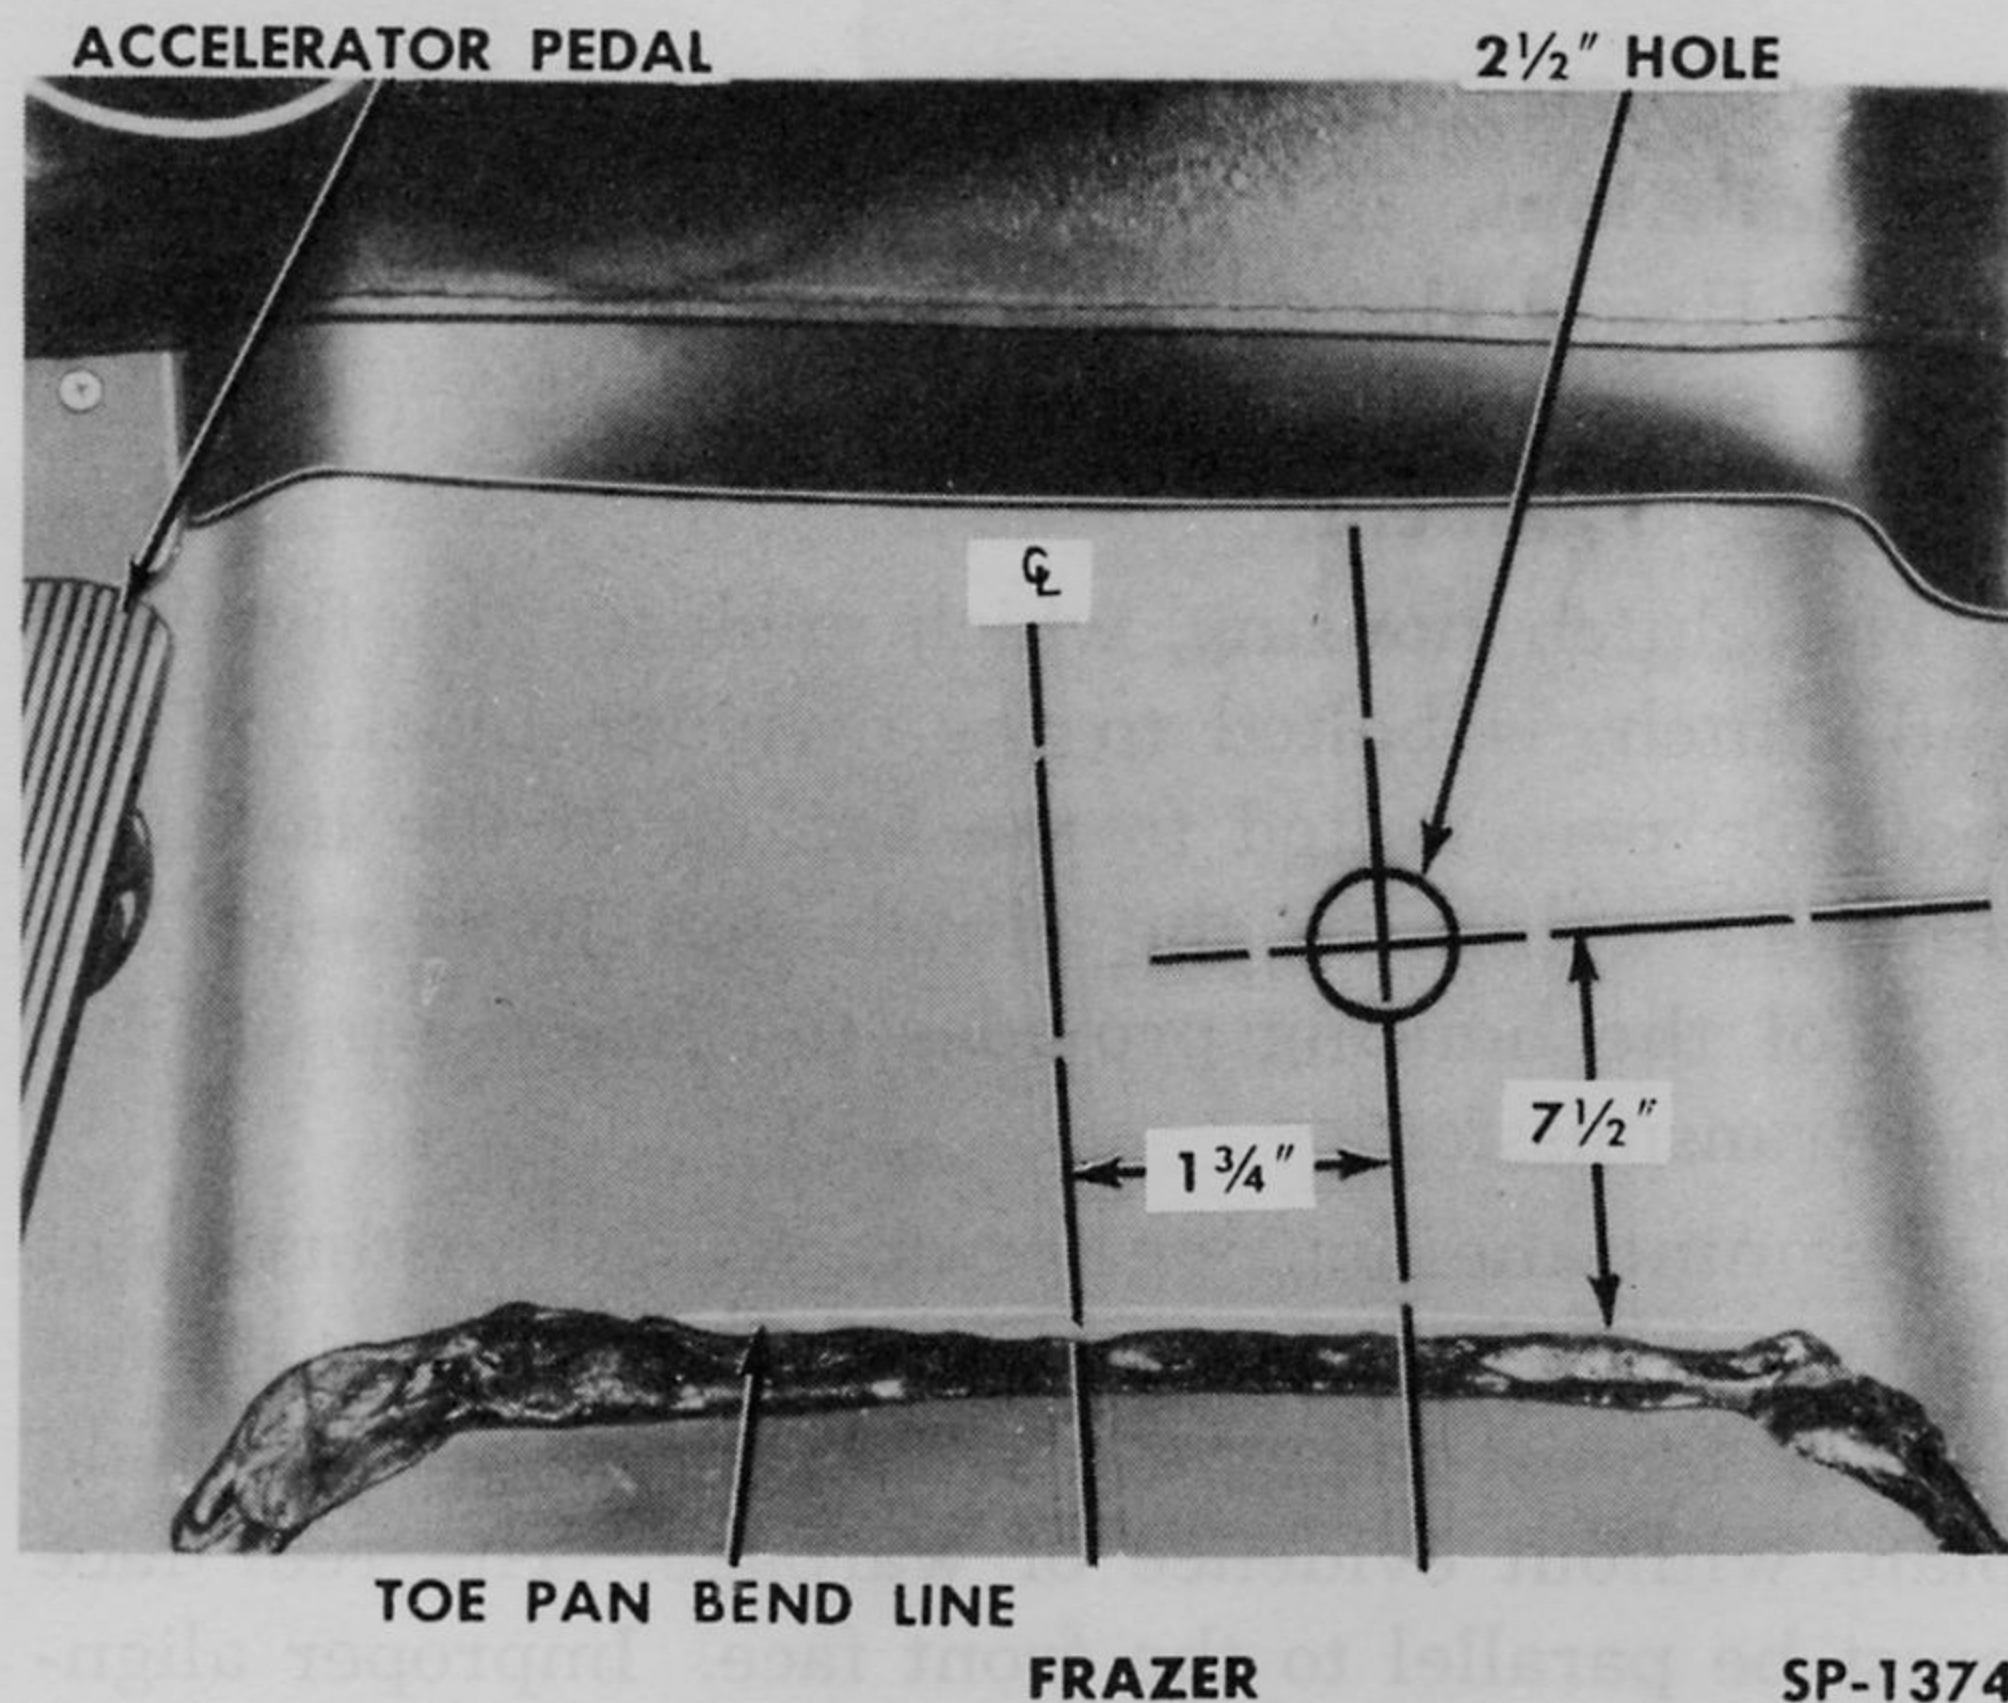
Locating Hole for Access to Rear Core Hole Plug
